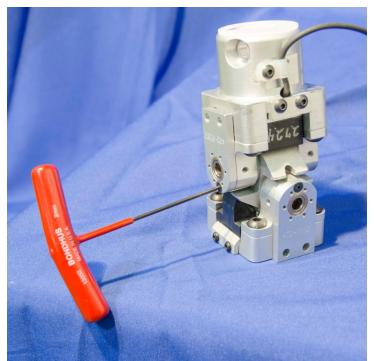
Install pot end ankle bushing plate assembly to torque bottom base
